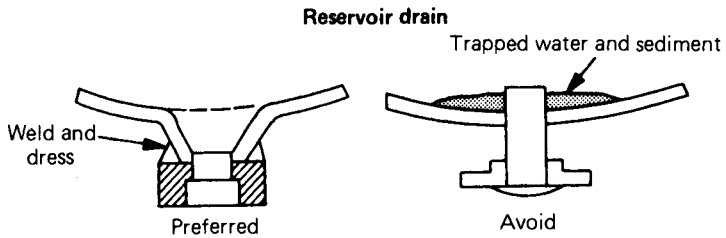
Drains for liquid reservoirs should permit complete drainage.
